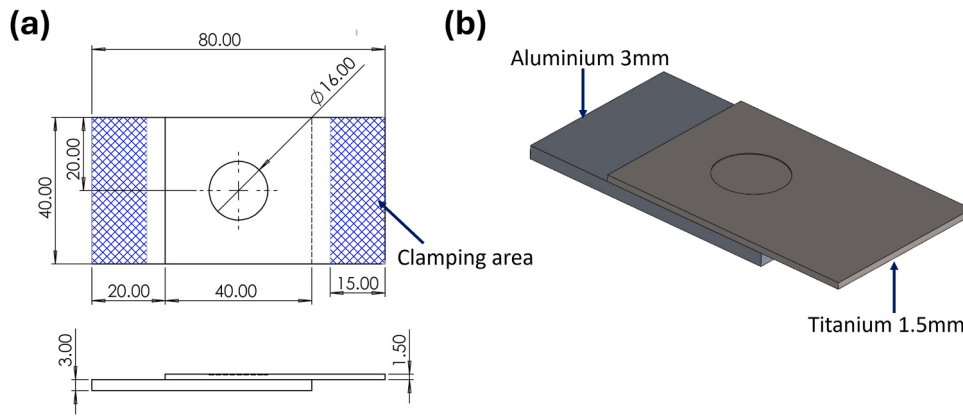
(a) The schematic of Lap shear test sample in 2D with dimensions (b) 3D view of the Lap shear test sample.
